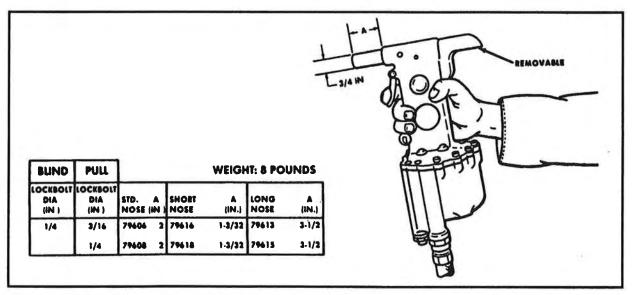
CP352 rivet gun for pull- and blind-type aluminum lock bolts
